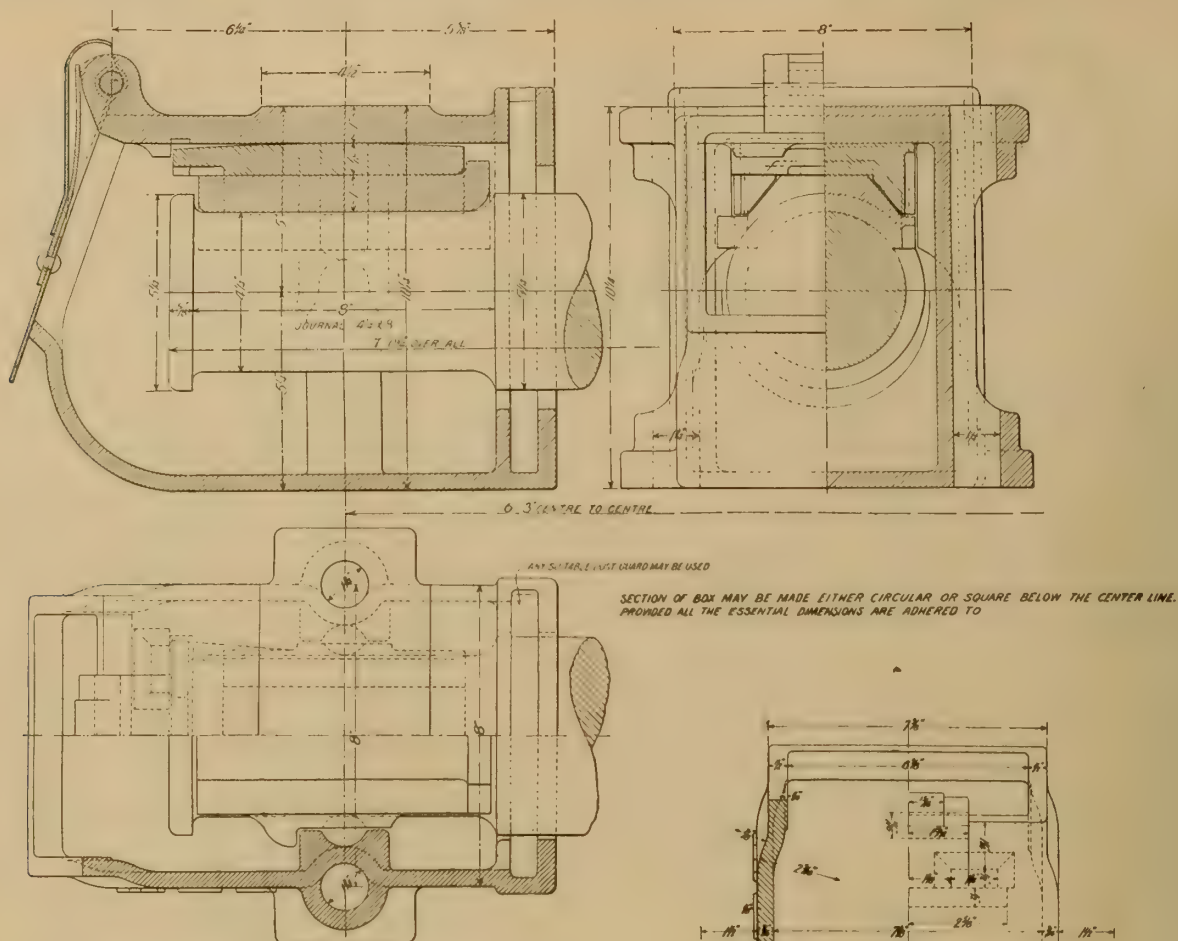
WEDGE FOR JOURNAL 3 3/4 IN. x 7 IN. SHEET 3.
